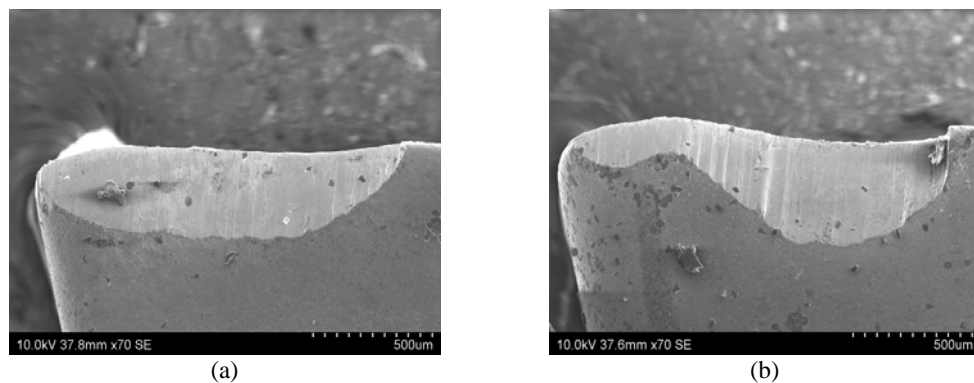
5 SEM images of flank face after cutting exposed by cutting fluid from nozzle at position (a) 12.5° and (b) 45°
